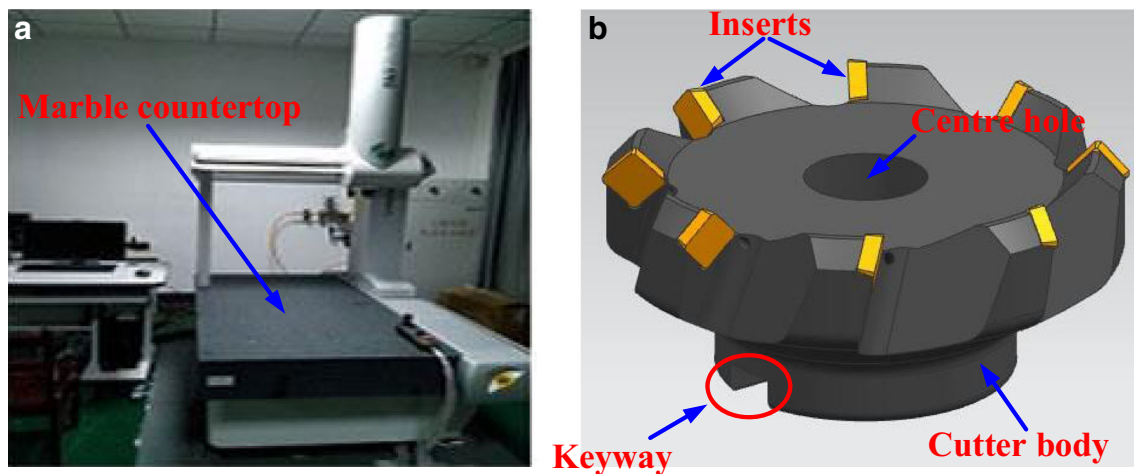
Model reconstruction: a the measuring platform of CMM and b 3D reconstruction model of tool C
